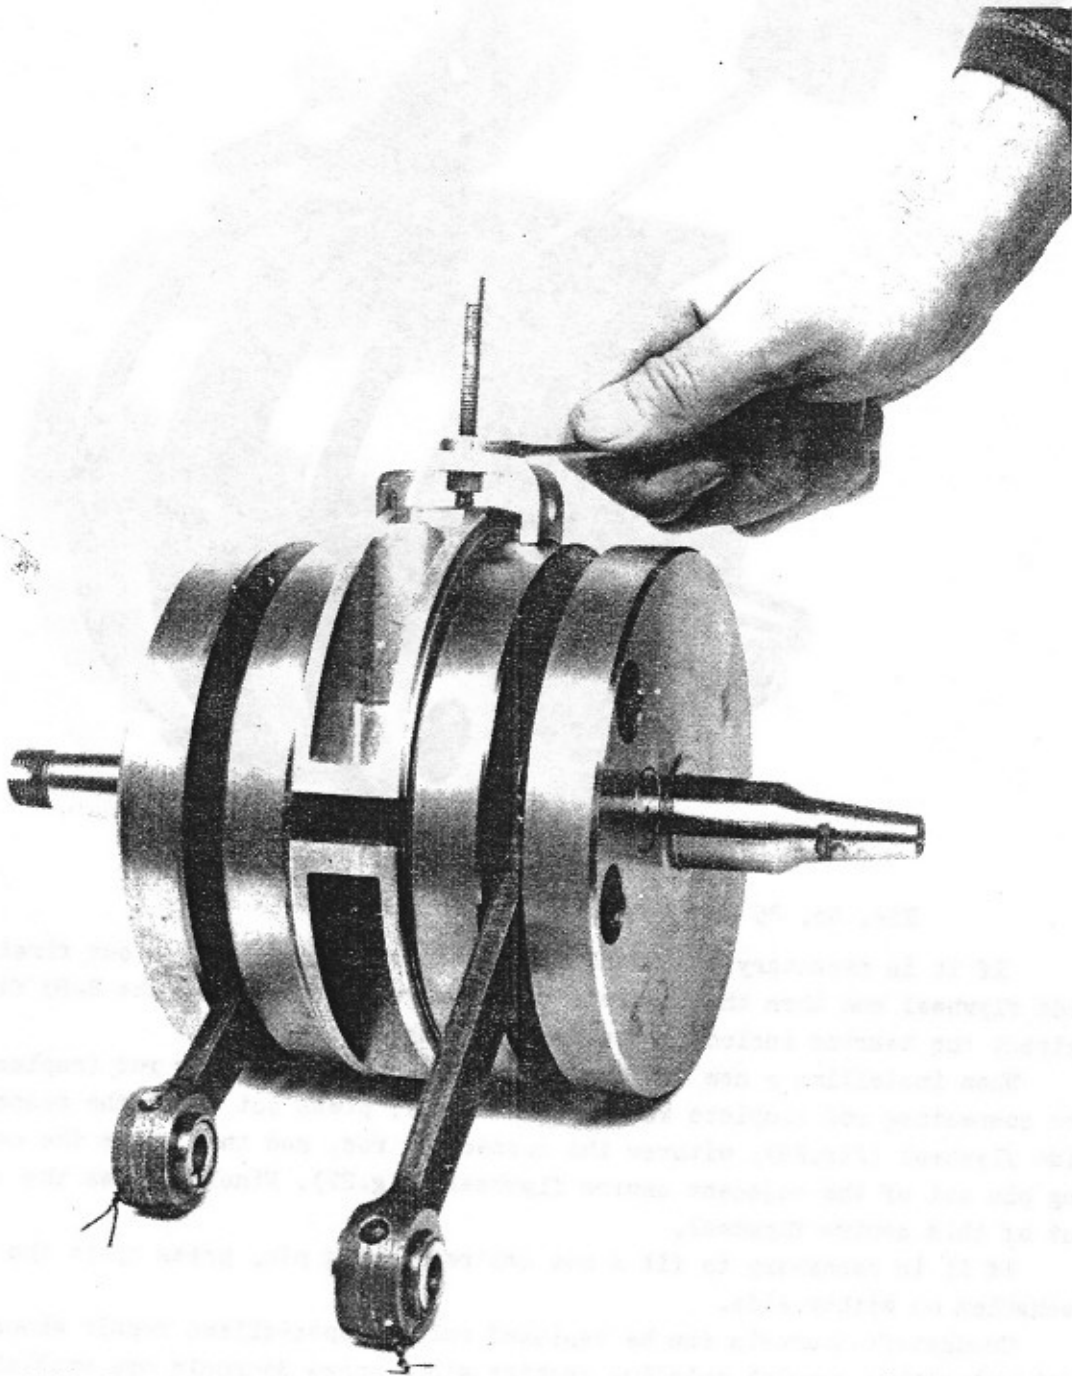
Splitting crank mechanism centre face plate (ring)
